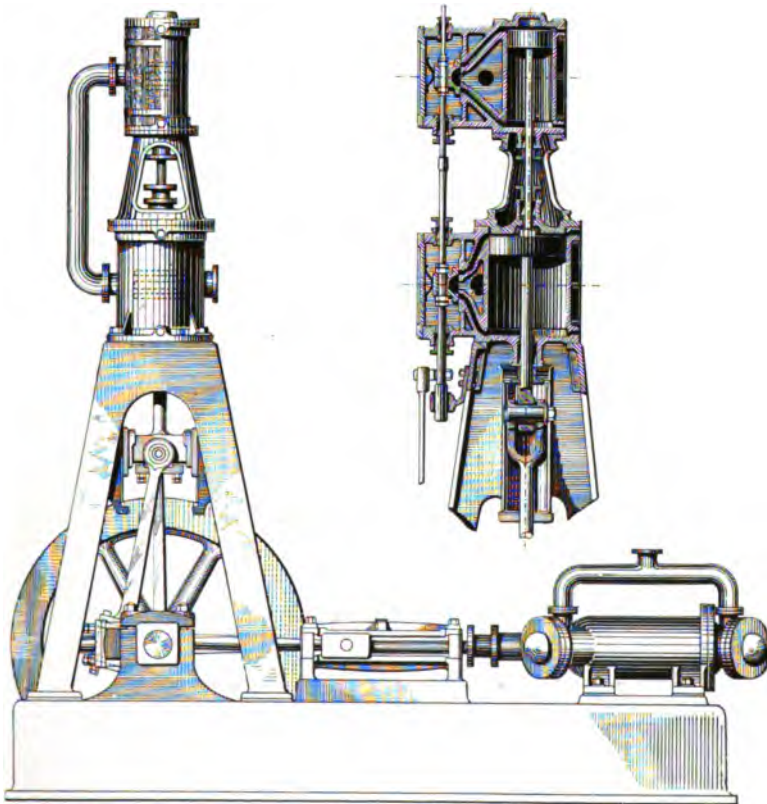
COMPOUND TANDEM ENGINE AND COMPRESSOR.
